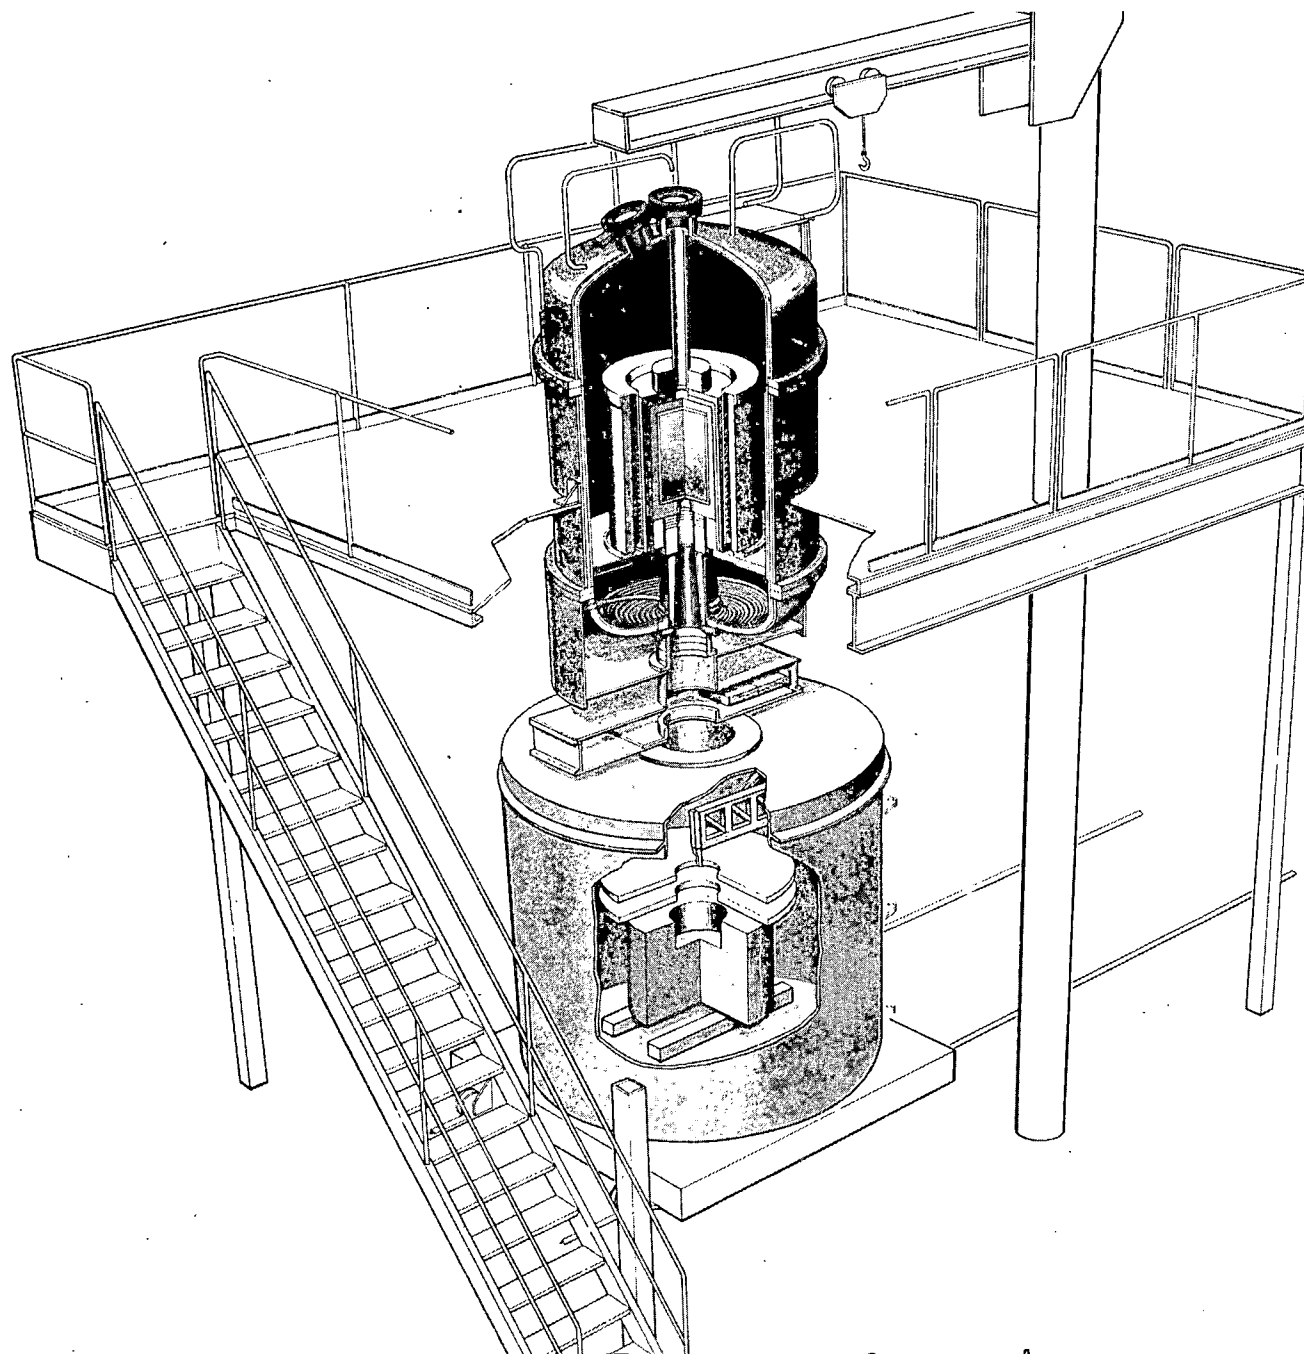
FURNACE/EXPERIMENTAL CHAMBER ASSEMBLY
